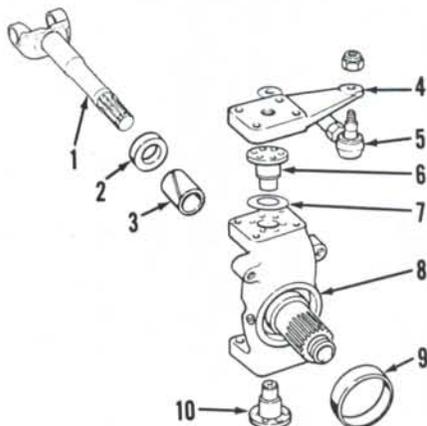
Exploded view of David Brown front drive stub axle showing component parts and their relative positions.
